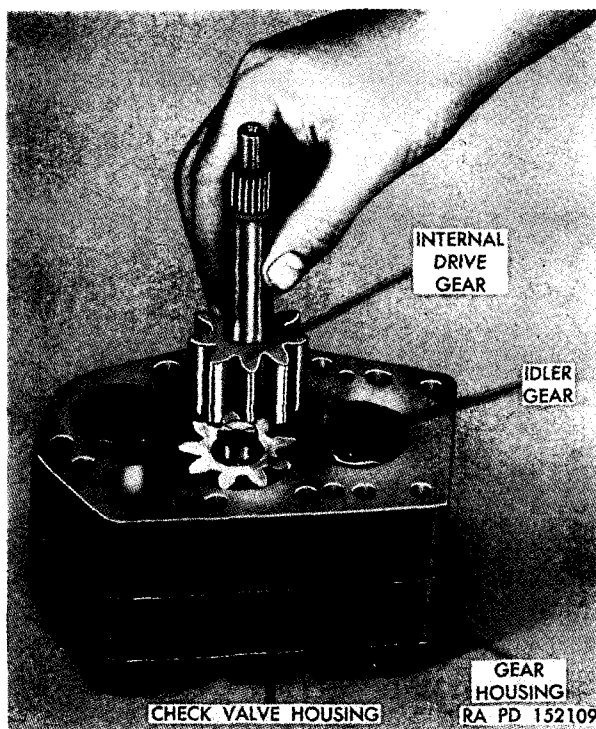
Installing output-brake and pressure-pump internal drive gear.
